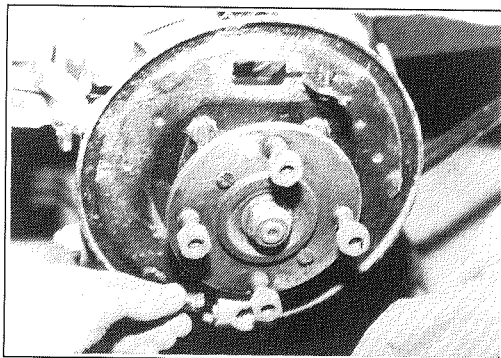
Offer in the handbrake lever and lightly coat the back plate sliding surfaces with copper grease. Bolt in the adjuster. Smear a coating of copper grease on the adjuster pistons before fitting.
